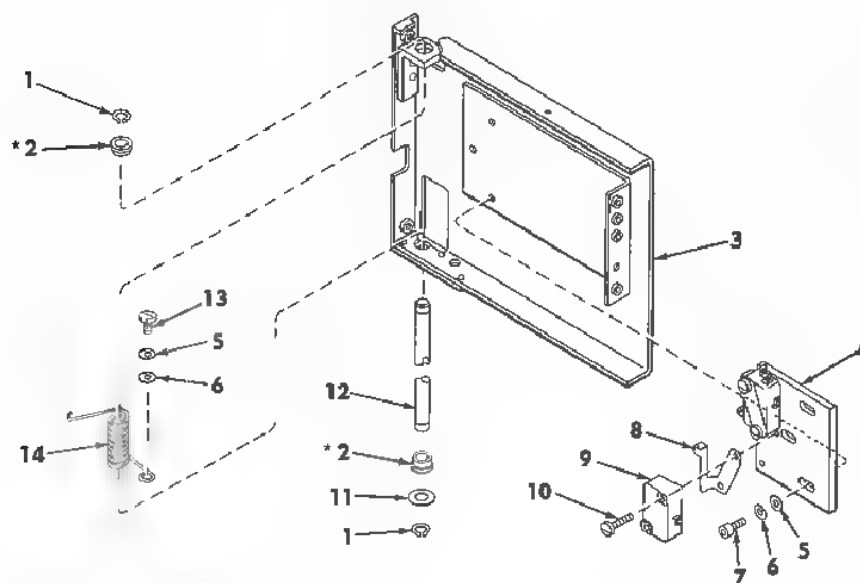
MODULATOR / 8172445/-PARTIAL EXPLODED VIEW
